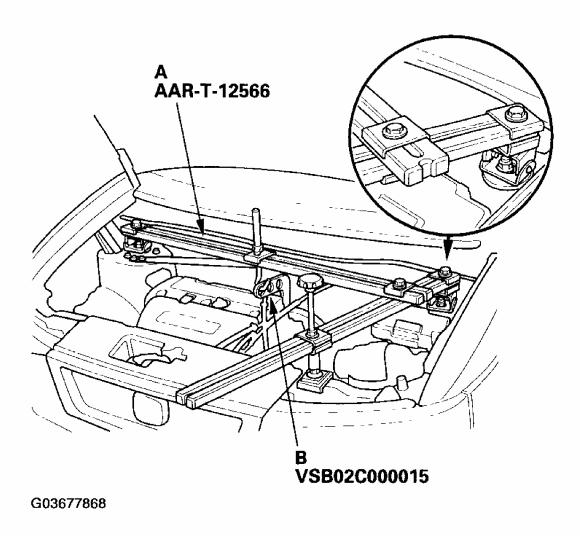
Installing Engine Support Hanger To Vehicle Courtesy of AMERICAN HONDA MOTOR CO., INC.
